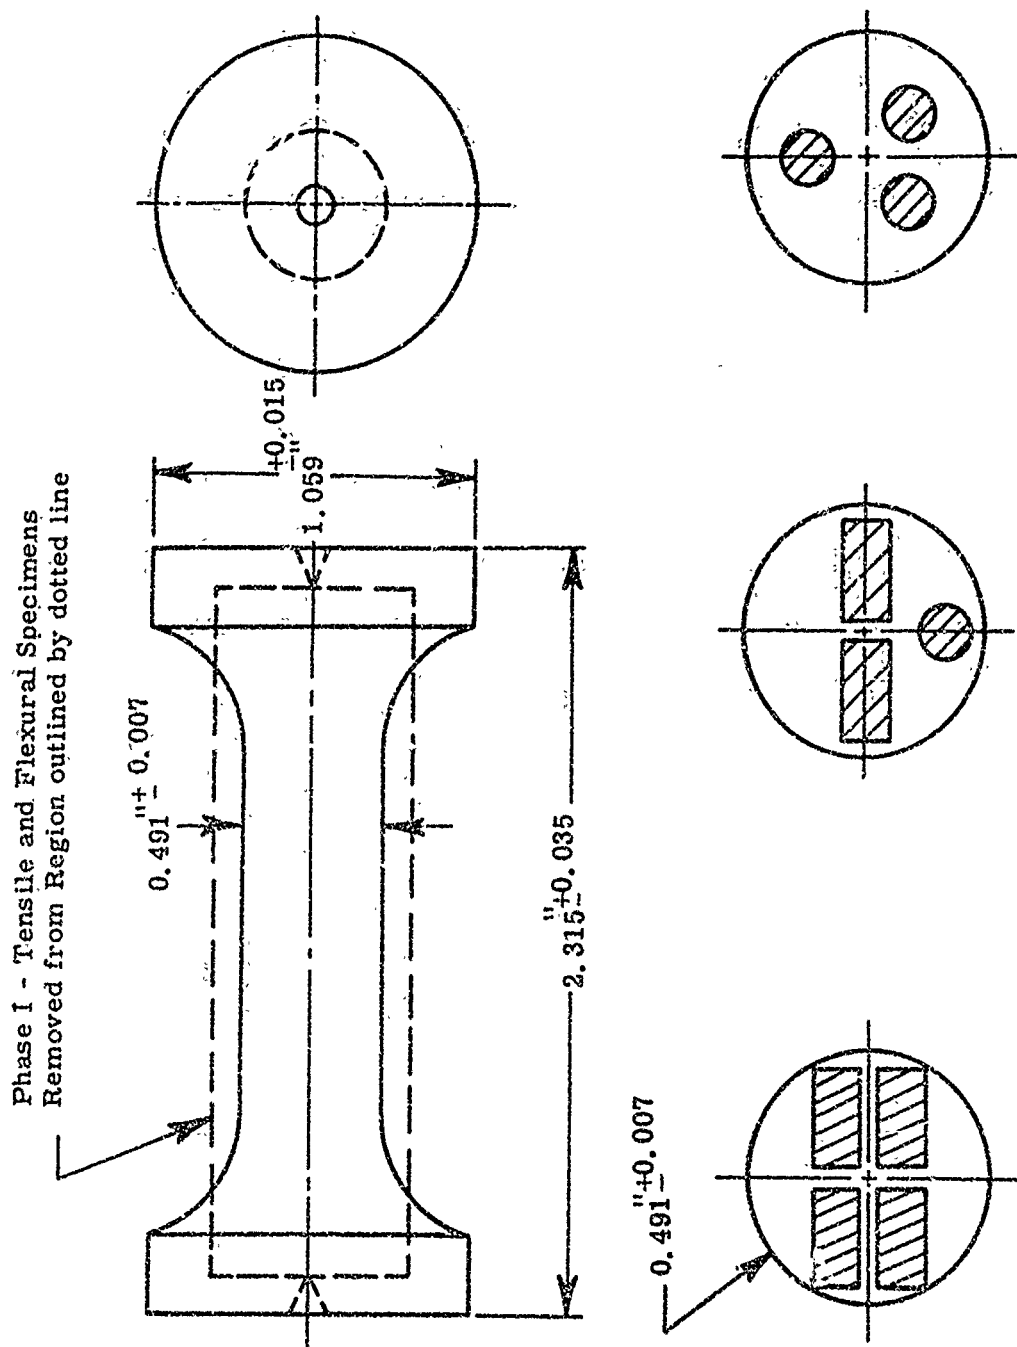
Configuration of Specimen Blanks 2A07 as Received from Coors and Cutting Plan for Removing Phase I Macro Tensile and Macro Flexural Specimens
